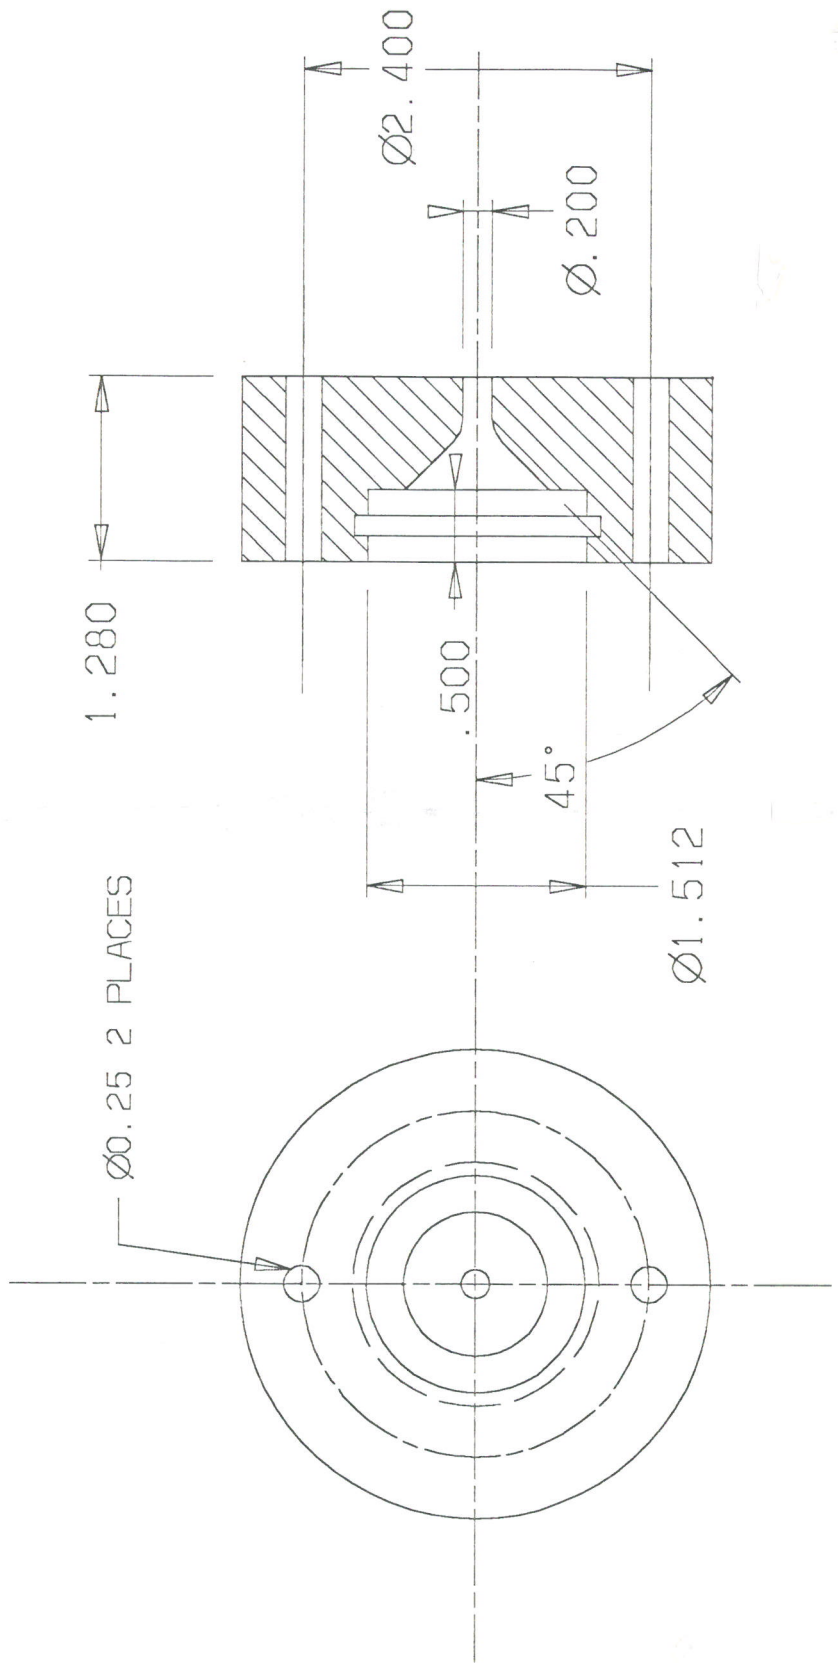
Stainless Steel Nozzle Showing "As Machined" Dimensions
